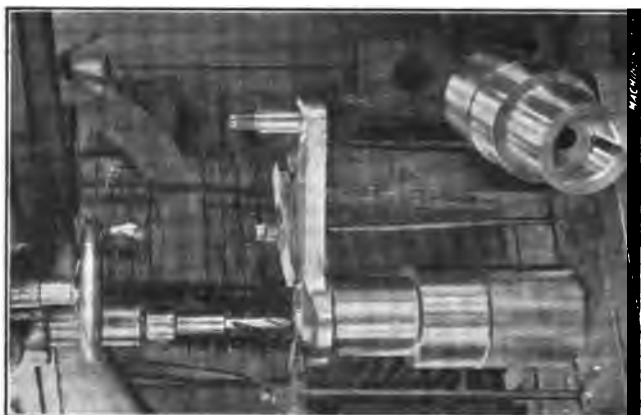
Drilling the Dowel Holes for Locating the Return Crank.
